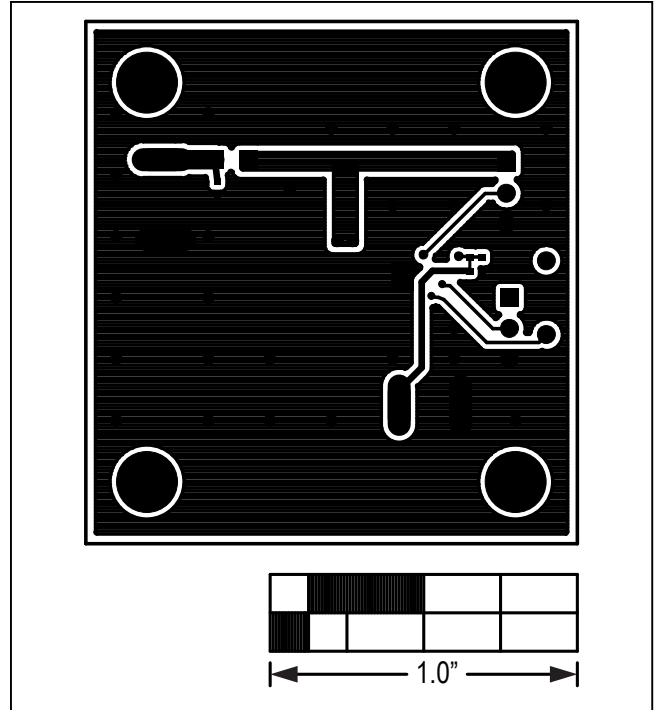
MAX16956 EV Kit PCB Layout—Solder Side
